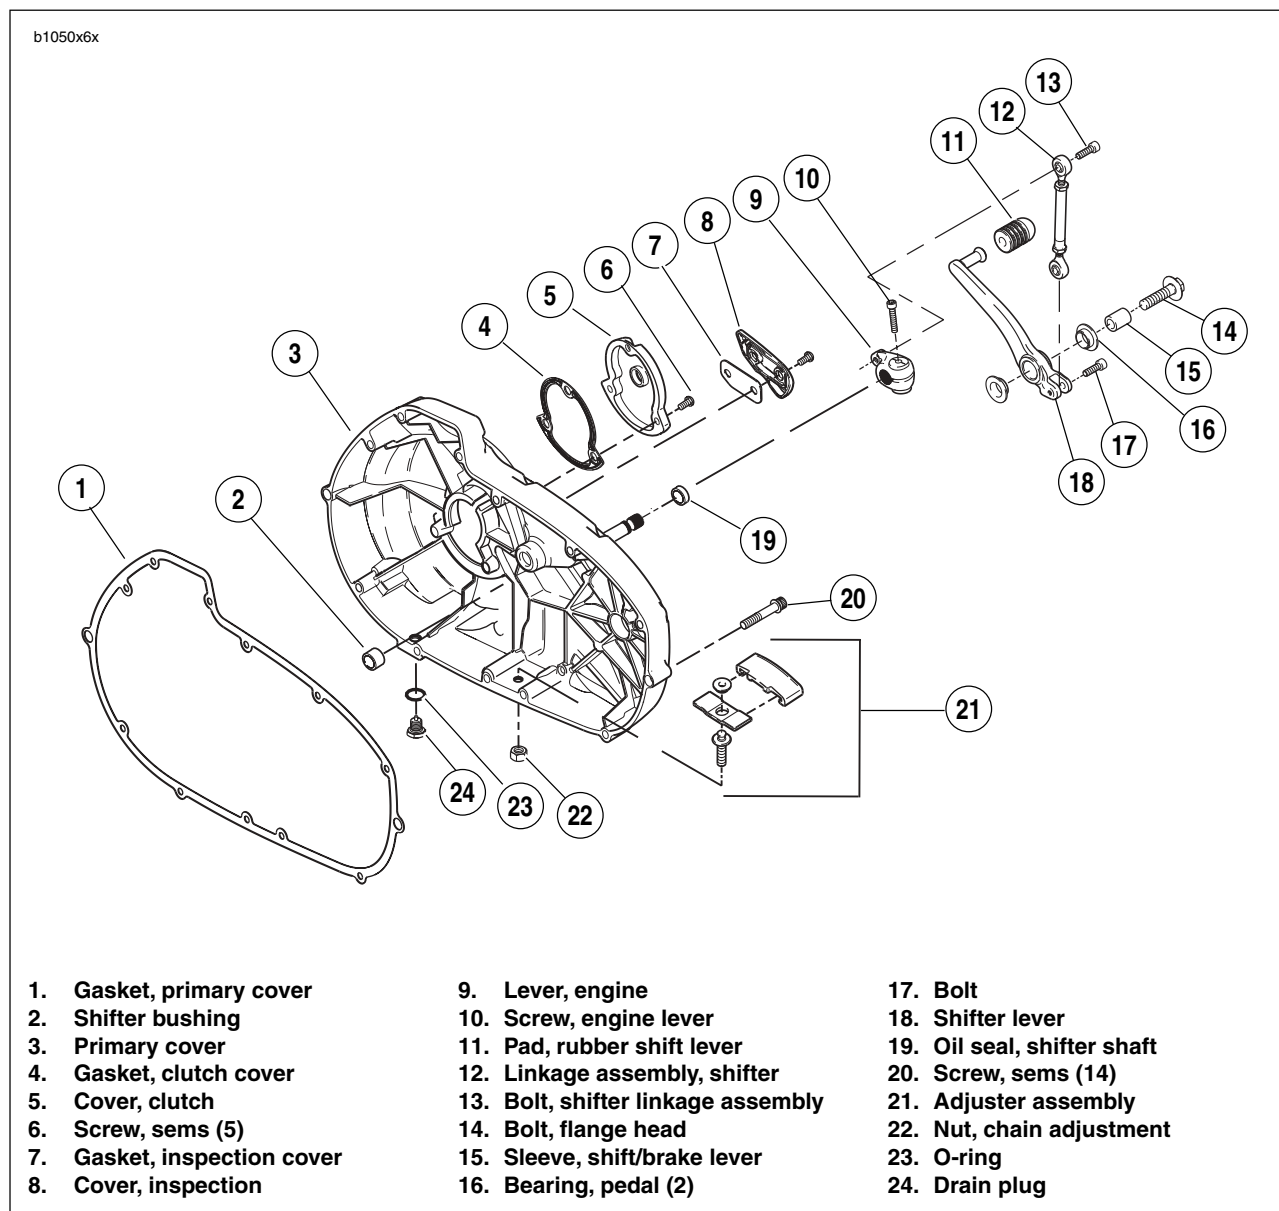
Primary Cover, Primary Chain Adjuster and Shifter Assembly
